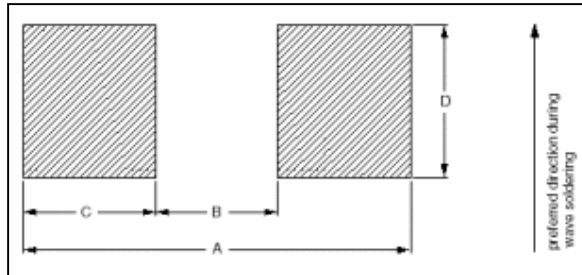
RECOMMENDED FOOTPRINT DIMENSIONS
